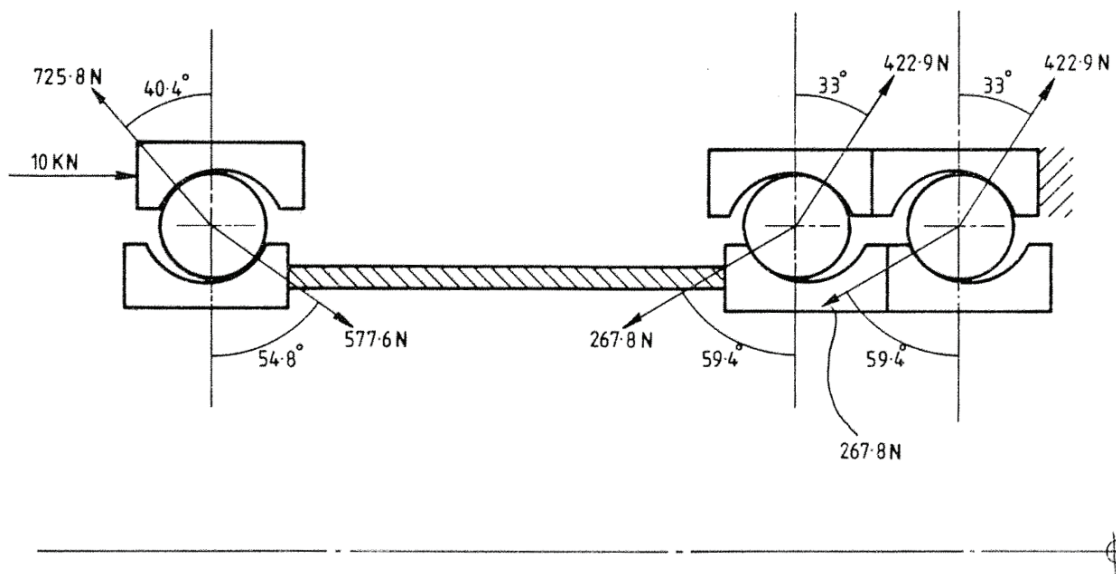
Contact angles and loads in single bearing and a bearing from tandem set with ILPT in pre-run state, predicted using SKF code BEARCENT
